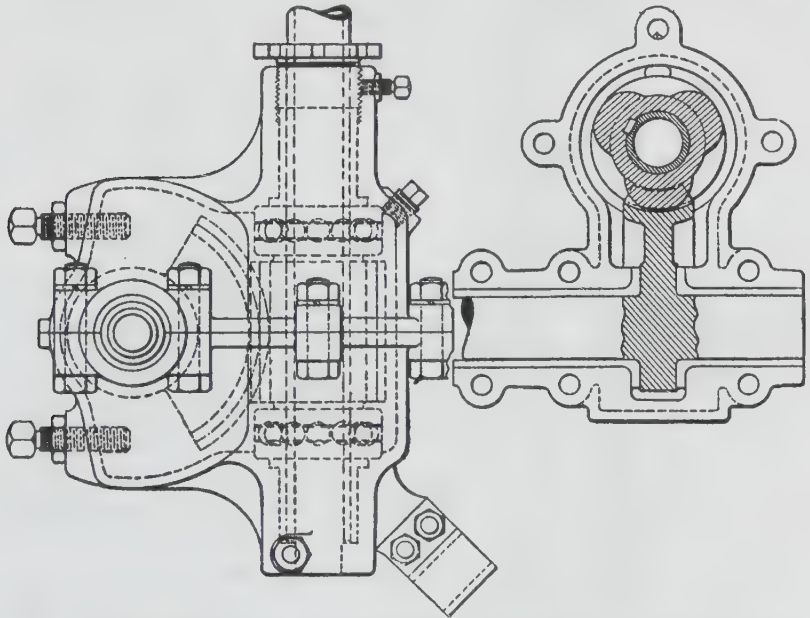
WORM AND SECTOR STEERING MECHANISM WITH CASING DIVIDED THROUGH THE SECTOR AXIS.
